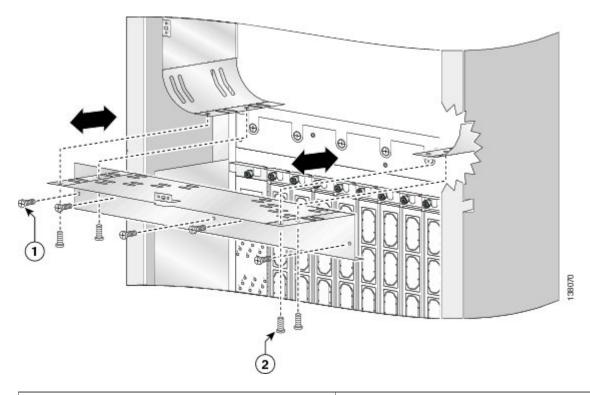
Outer cut-out plate—Fixed Configuration Power Shown
